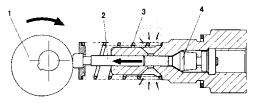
Pump Element – Cross Section View Piston Return Stroke, Check Valve Closed.
